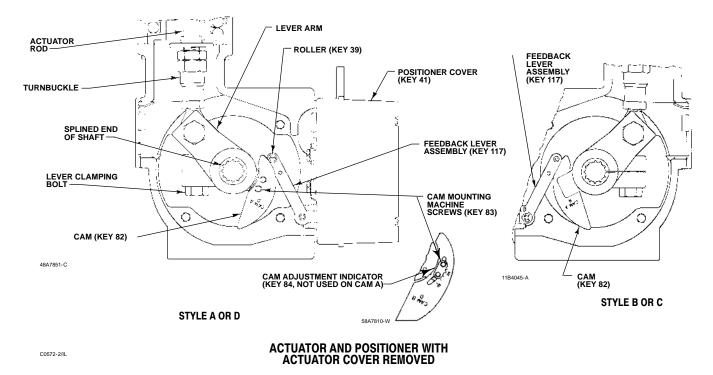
Typical Mounting Details for 3610J and 3620J Series Positioners on Rotary Actuators
